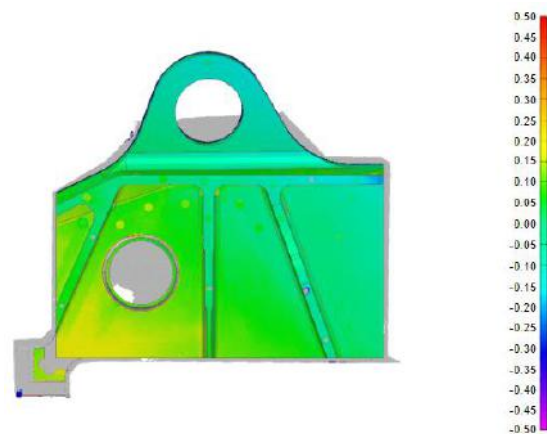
3D dimensional scan of the machined part, compared to the 3D drawing of the part.
